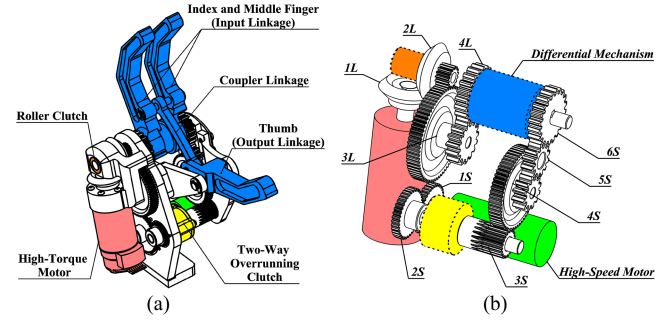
Overall components of the prosthetic hand, including (a) the finger mechanism, drive mechanism, non-backdrivable mechanisms (NBDMs), and actuators, (b) the positions of each gear in the gear trains and their connection.
